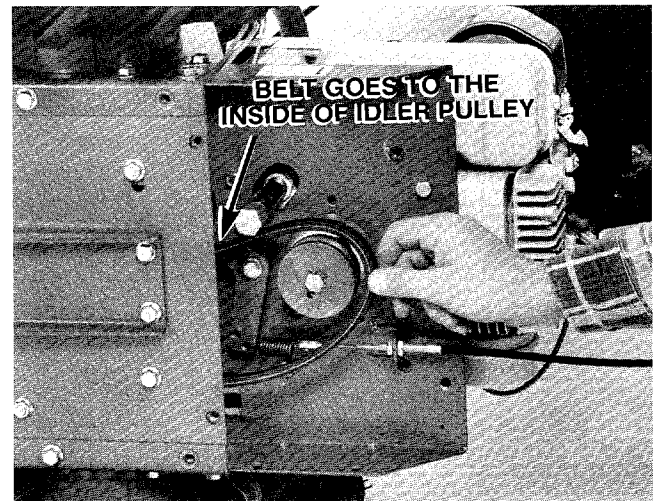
Placing the cutter bar drive belt on the engine pulley.
